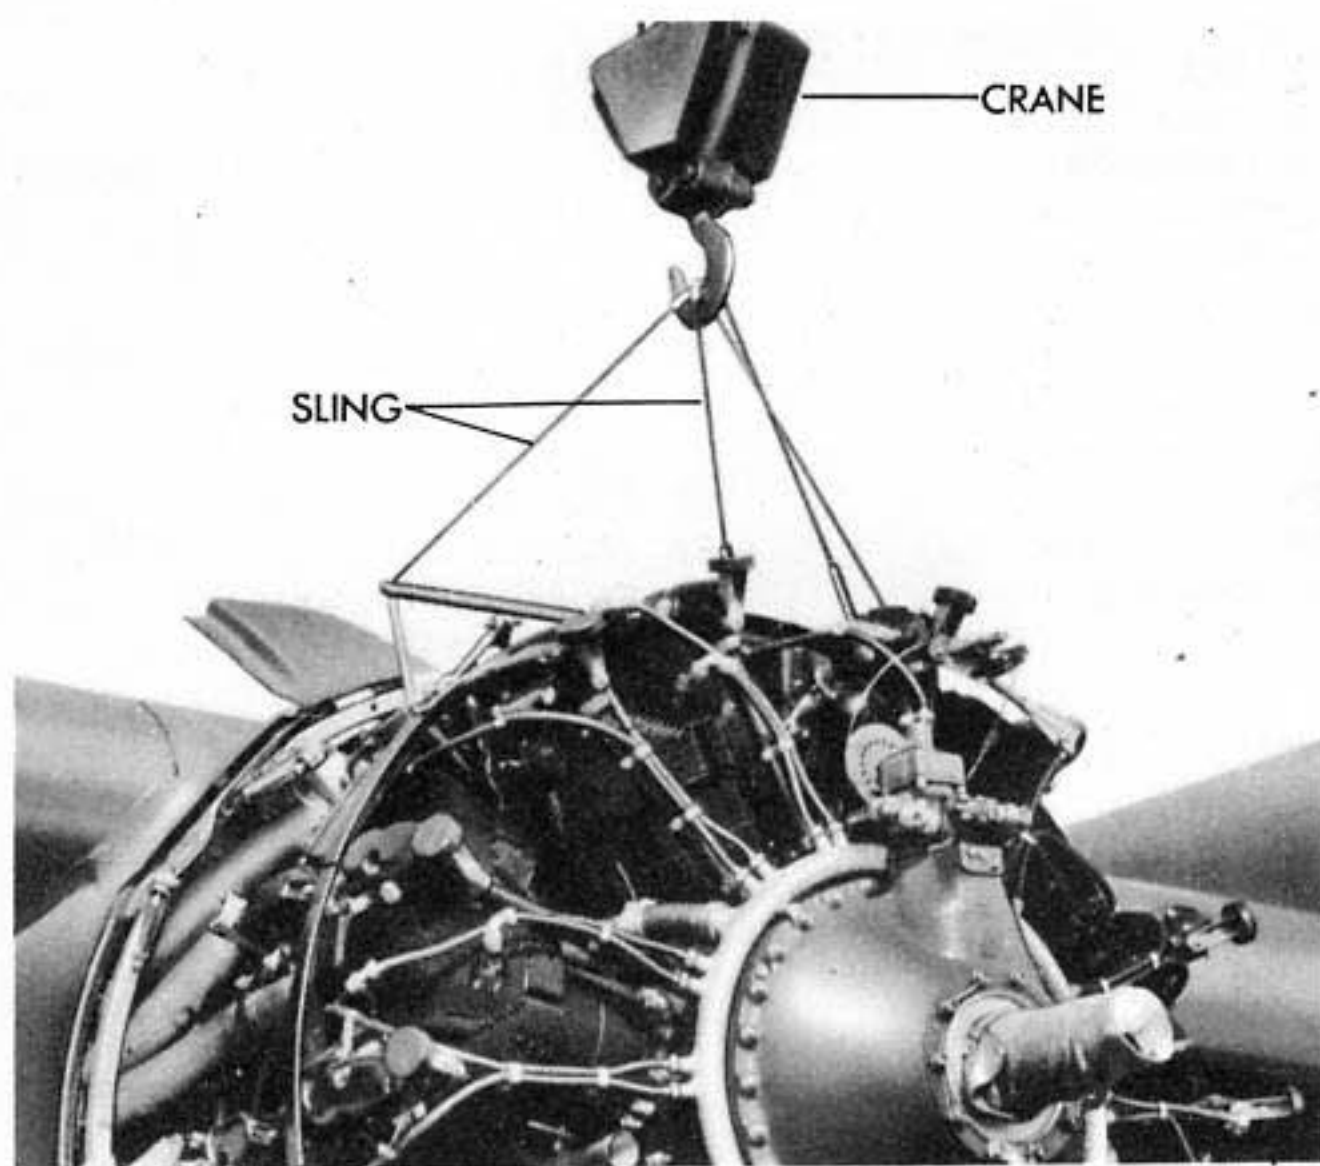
CRANE ENGAGED FOR ENGINE REMOVAL
